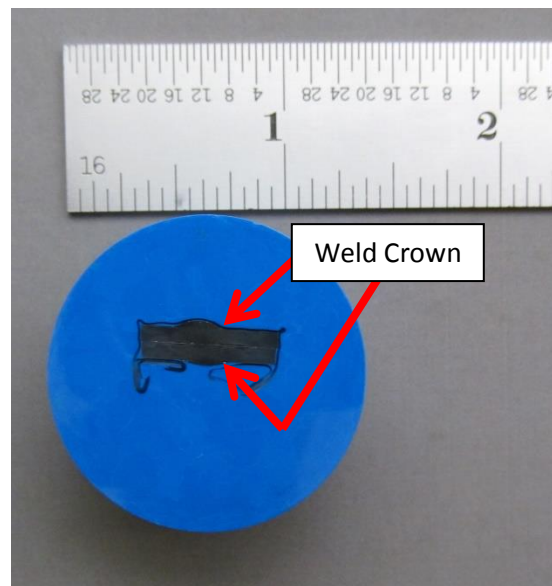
Metallographic mount of two transverse cross sections of a weld. Mounted in 1.25" diameter blue diallyl phthalate (mineral filled).
